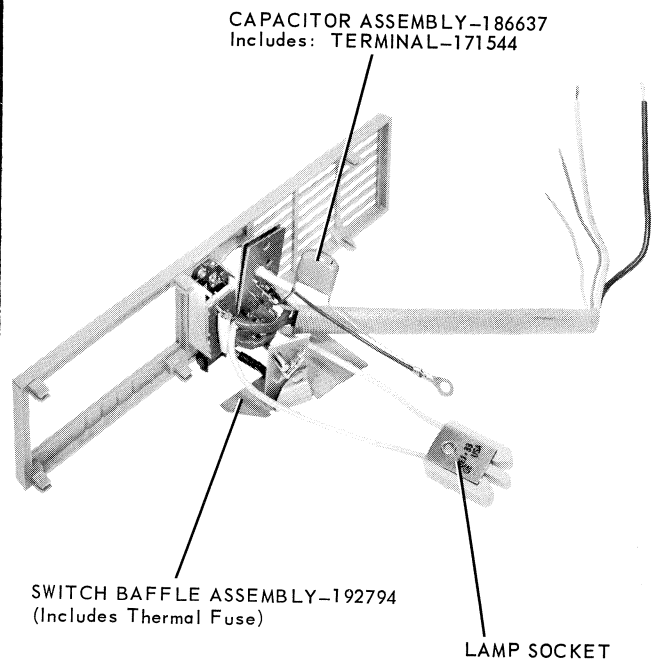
GRILLE ASSEMBLY (760H)-192762
